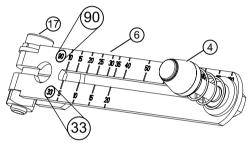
Long lever 6DR4004-8L with mounted carrier pin 4 and cylinder head screw 17
